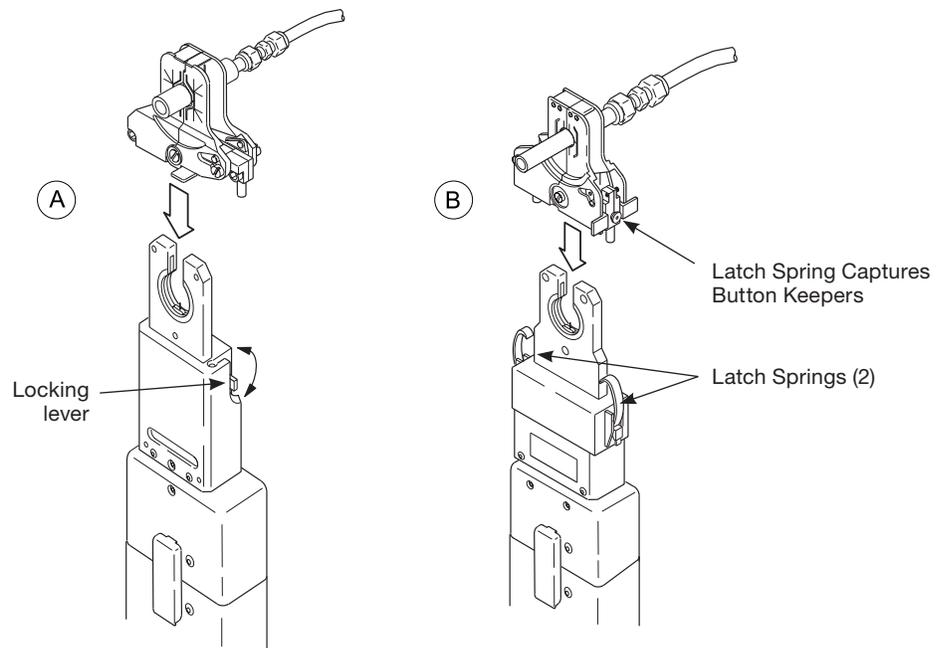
Placing the Fixture on the Micro Weld Head
